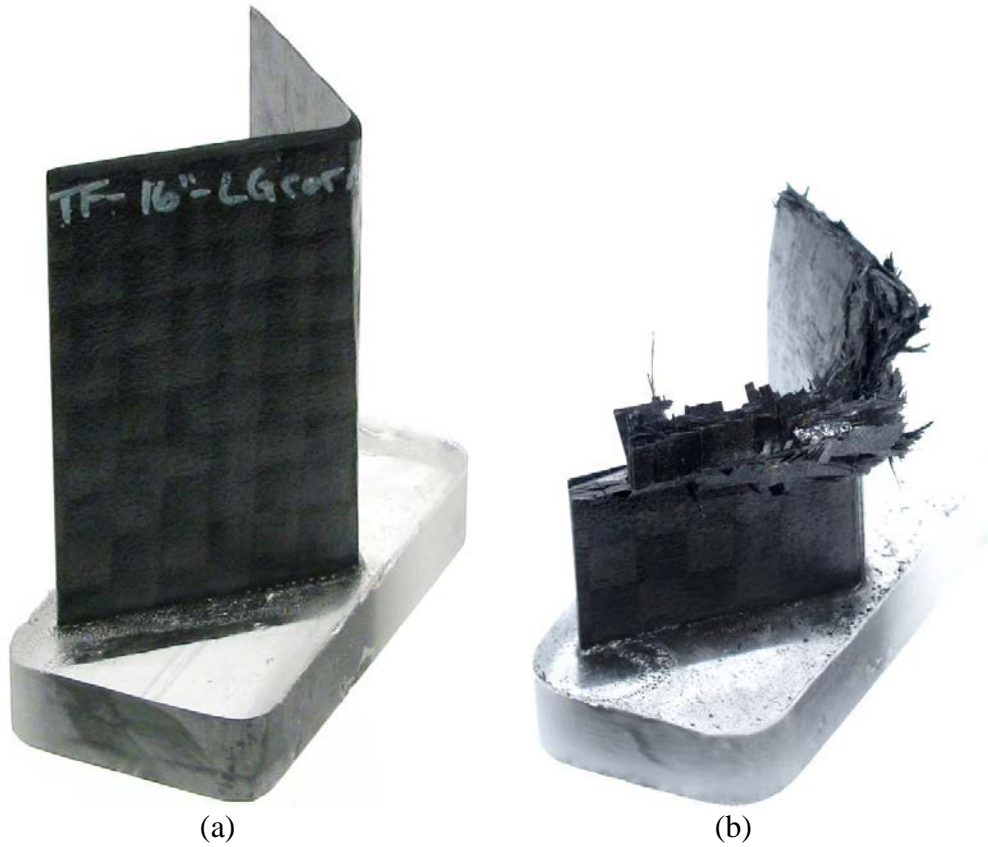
Large corner, specimen V, (a) before and (b) after crush testing
